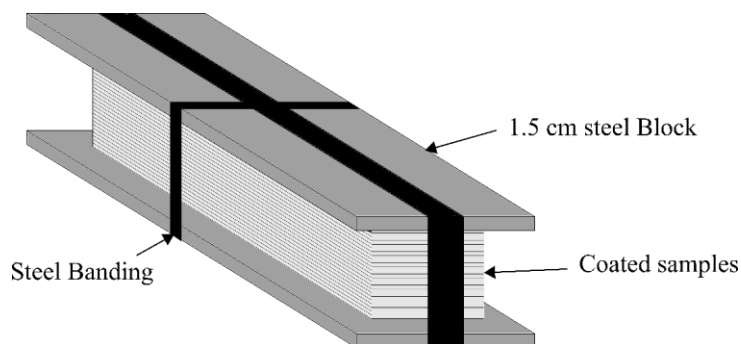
Drawing of the sample's places between steel block with banding holding the samples and steel blocks to gather.
